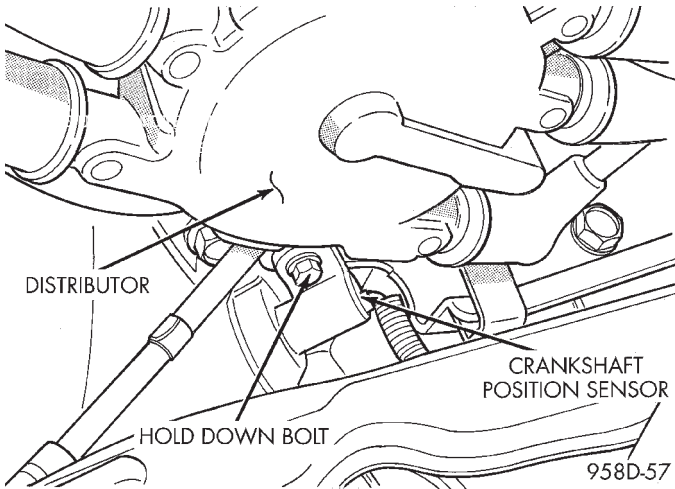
Crankshaft Position Sensor—2.5L Engine
